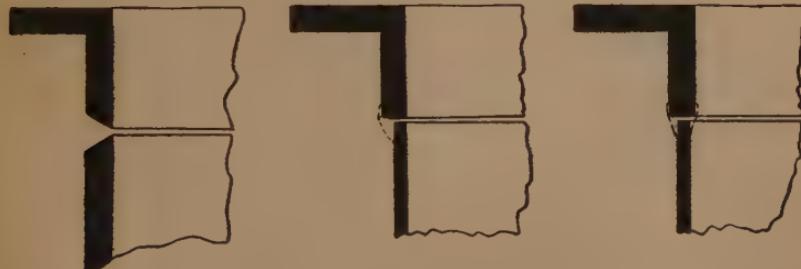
Welds for Tank Reinforcing Rings
